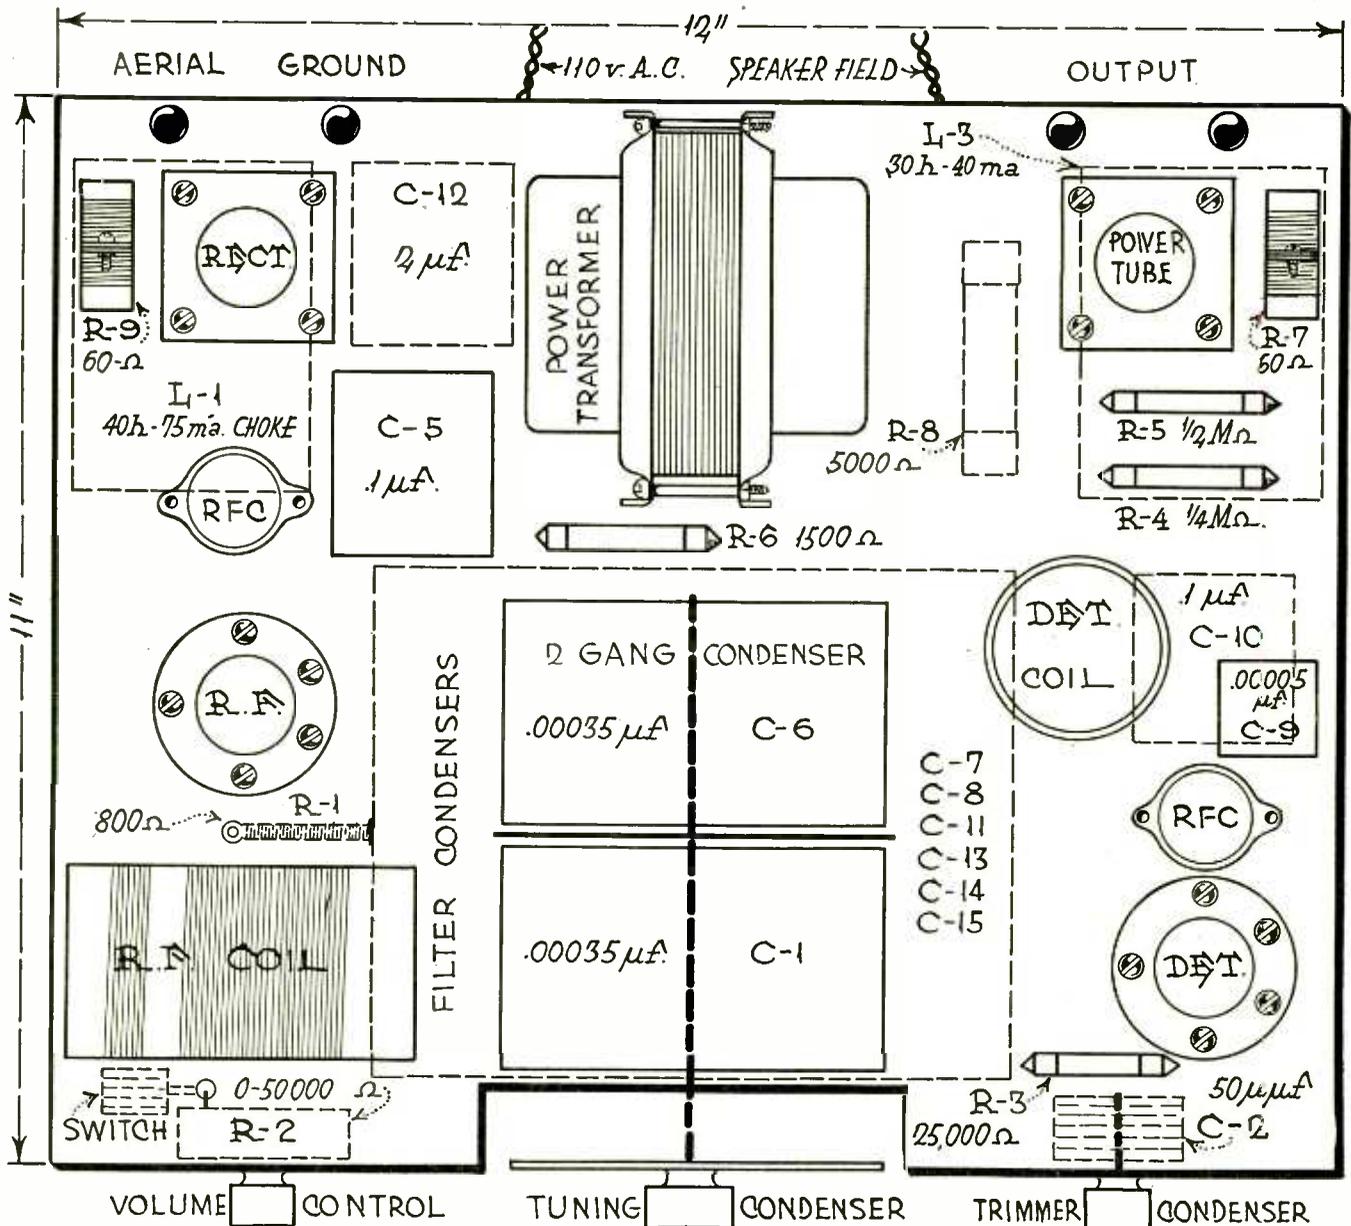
Baseboard Layout of Experimental Three-Tube Set
